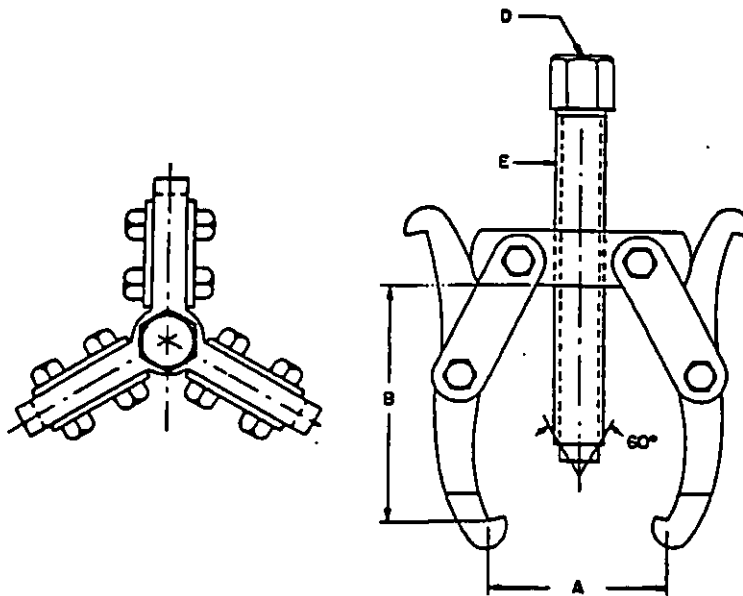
Type I, class 2, style B, puller, mechanical, gear and bearing, three-jaw, external, double end grip. (See Table II for size specification.)
